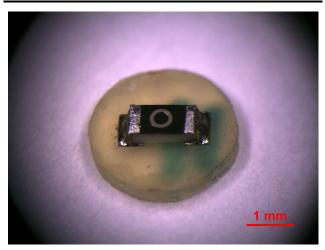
Sample with 0603 SMD resistor soldered to the soldering pads on the PCB.
